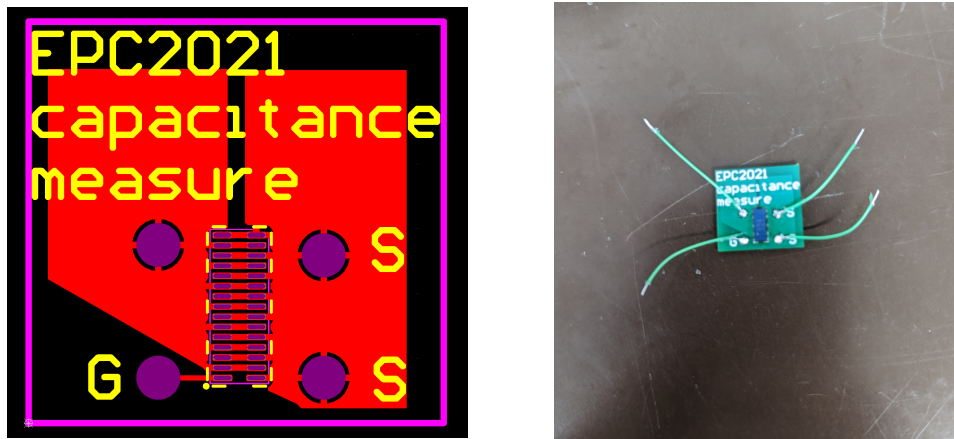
The designed PCB (left) and the received PCB with the test leads soldered (right).
